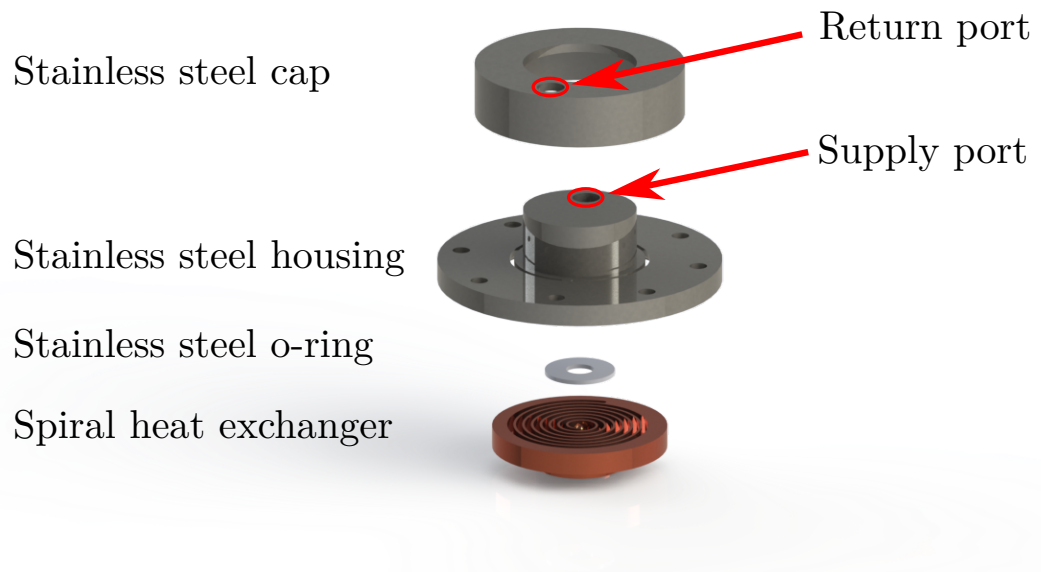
Exploded view of the whole heat exchanger. Stainless steel connections were welded, whereas the copper to stainless steel joint was brazed on.
